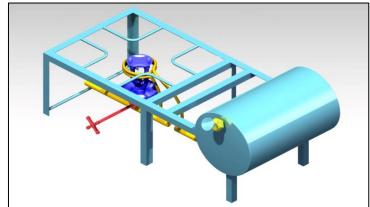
3-D View of Modified Horizontal Kerosene Stove.
